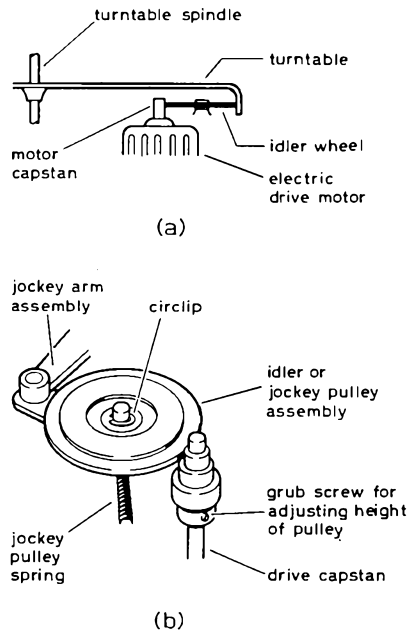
Turntable drives: (a) in cheaper models, direct from motor capstan, via idler. (b) speed change, via stepped pulley, and jockey or idler wheel assembly
